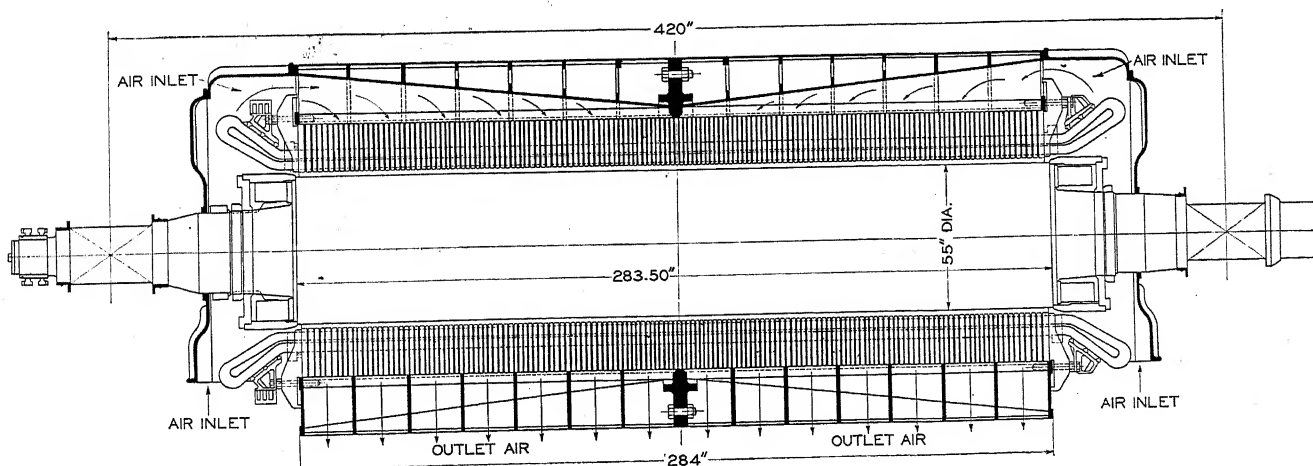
SECTIONAL VIEW OF 115,000-Kw., 18,000-VOLT GENERATOR
